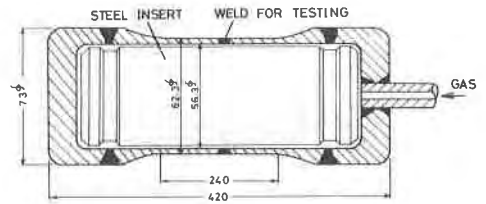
Structure and dimension of welded cylindrical specimen for creep testing with internal pressure loading.
